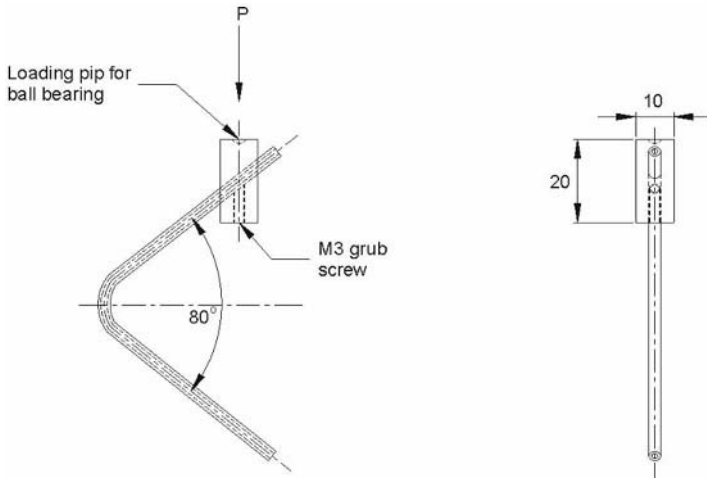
Schematic diagram of the loading arrangement for the deformed pipe tests.
